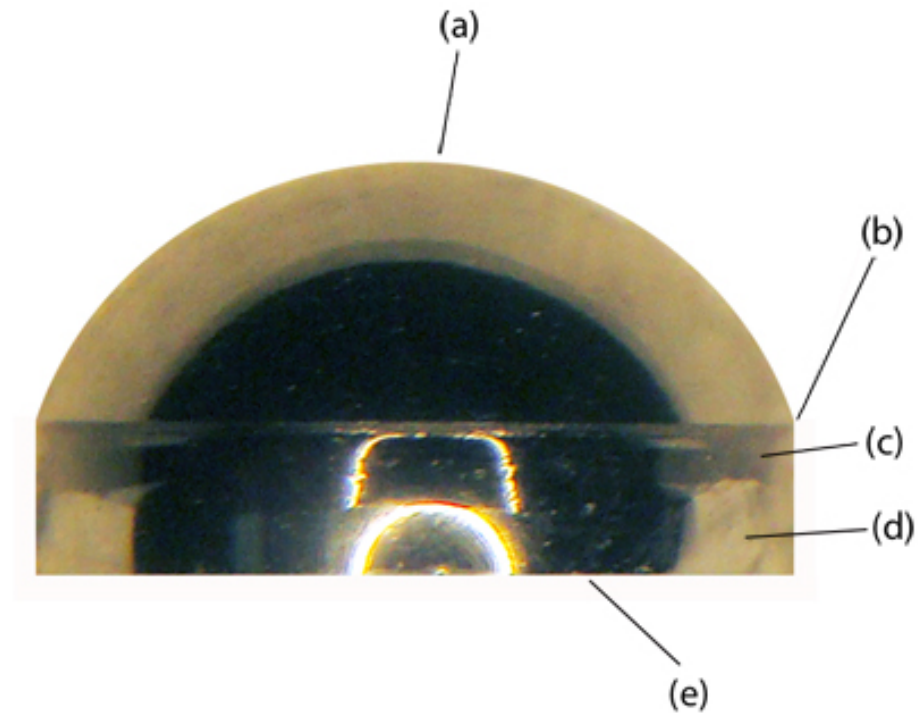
Lenslet with AR coating. Inspection points include (a) inspection of bubbles or particulates between the AR coating and the silicon surface, (b) the trimmed edge of the AR coating is in a plane parallel to (e) the bottom of the hemisphere, (c) the Stycast 1266 fillet is continuous around the hemisphere, and (d) the fillet stops so that bare silicon is exposed at the equator of the lens, enabling the correct fit into the silicon seating wafer.
